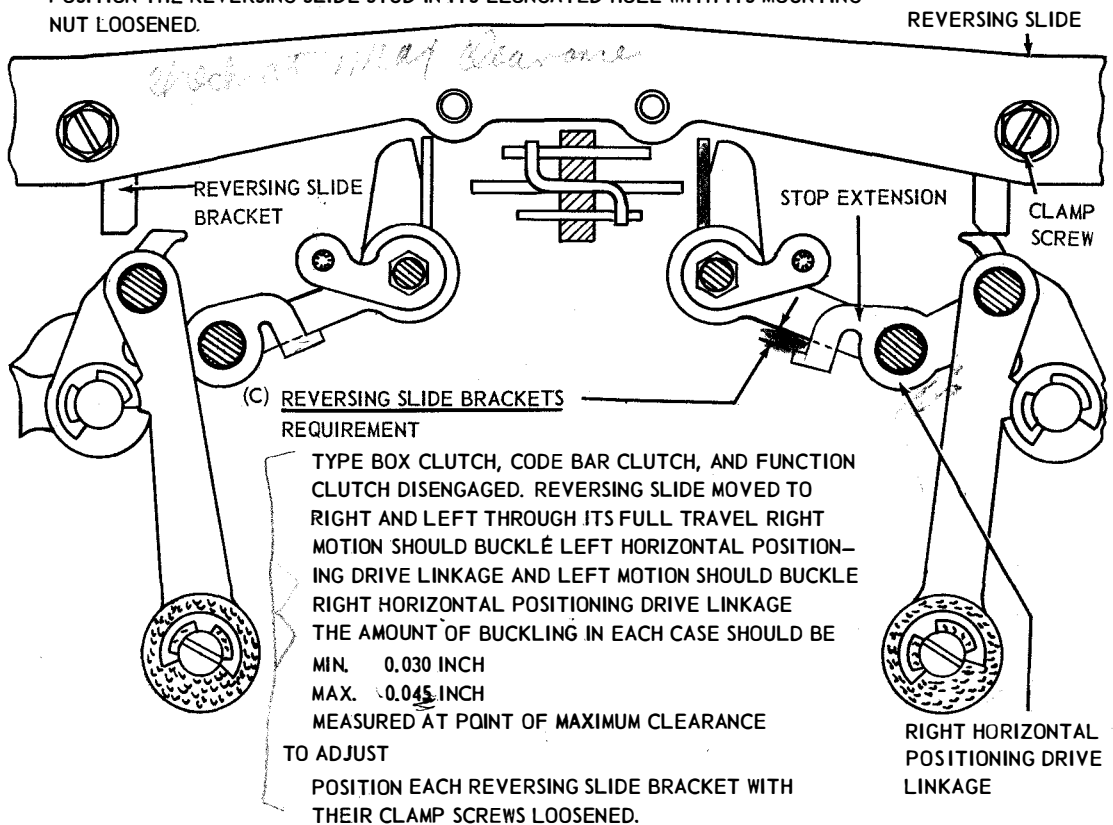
TYPING UNIT, HORIZONTAL MOTION REVERSING MECHANISM FRONT VIEW
